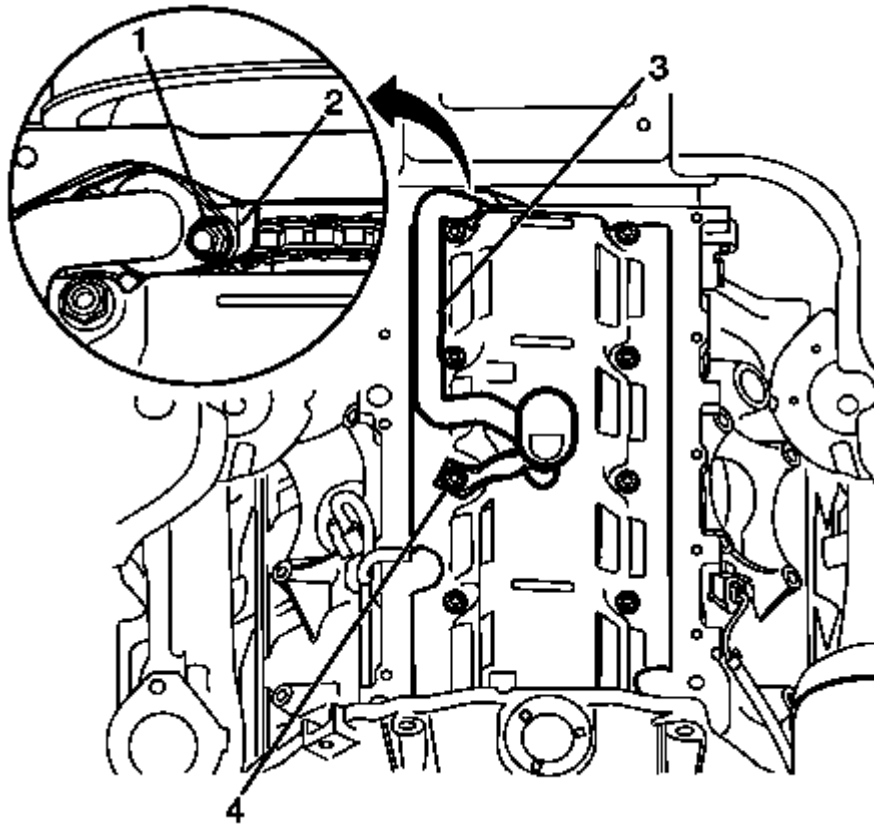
Identifying Oil Pump Screen & Tube Assembly To Oil Pump Retaining Bolt
